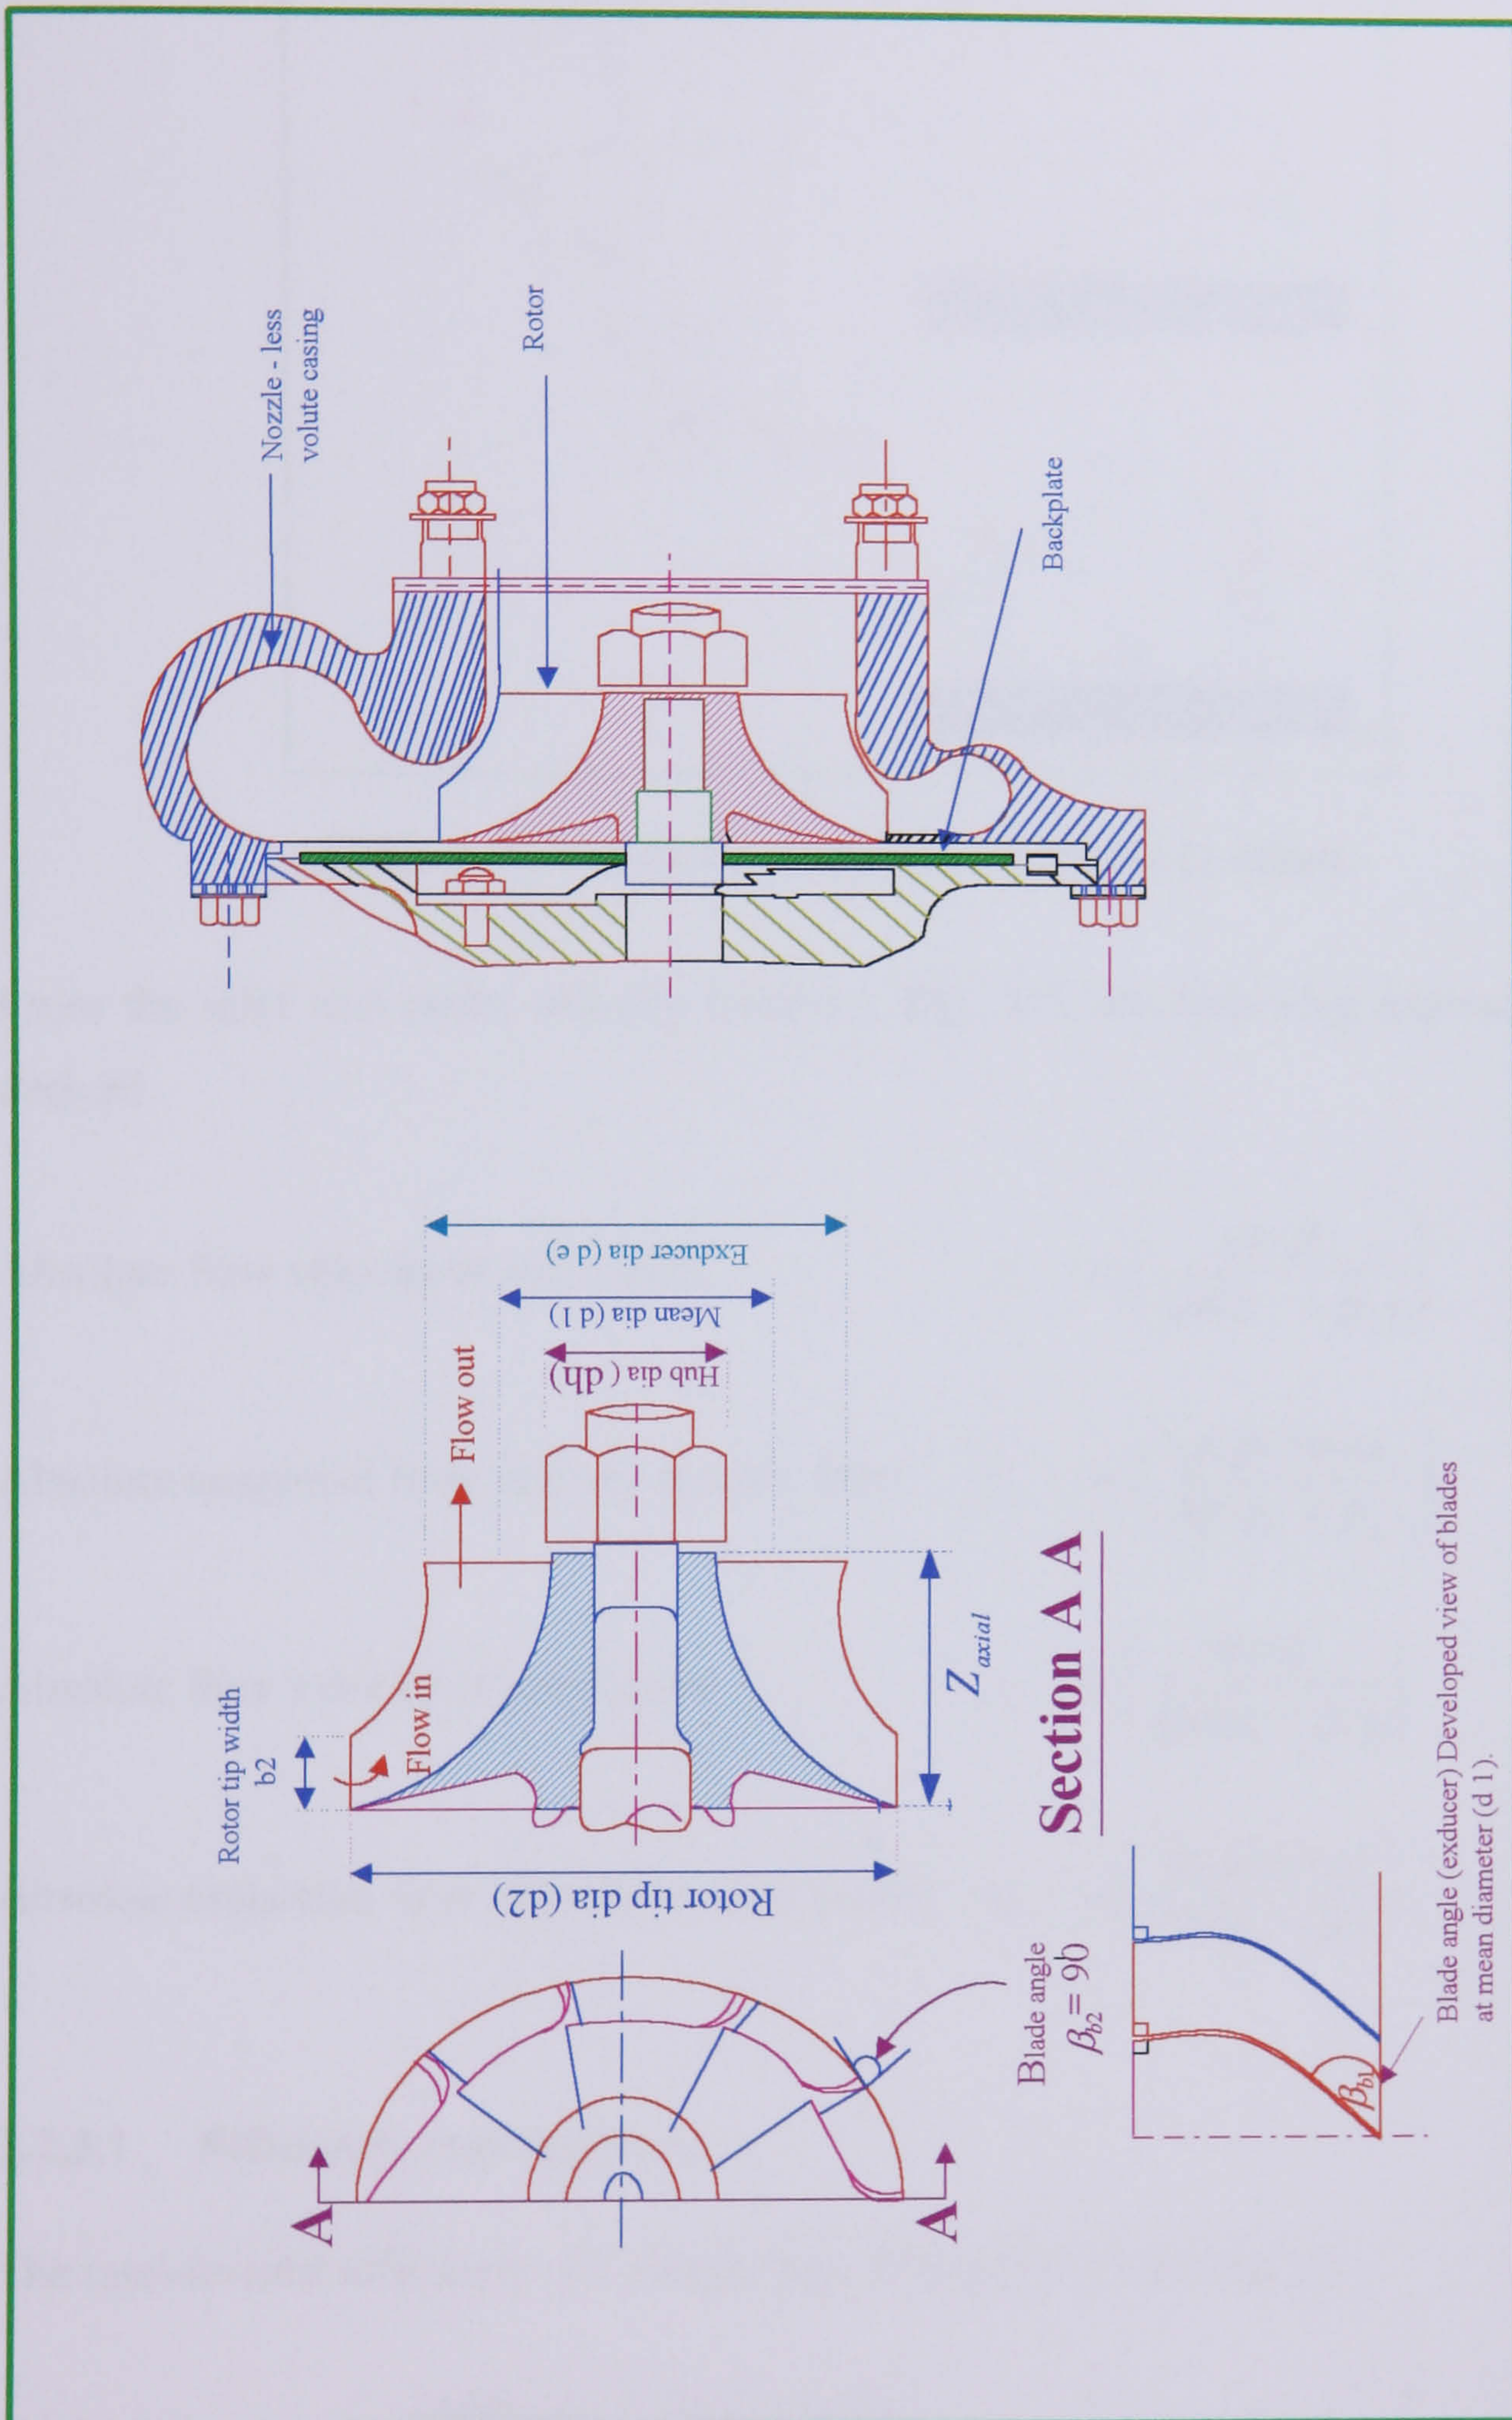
THE GEOMETRICAL SHAPE AND THE PRINCIPAL DIMENSIONS OF THE TURBINE
